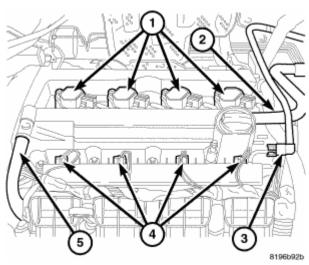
COIL CONNECTOR Courtesy of CHRYSLER LLC
